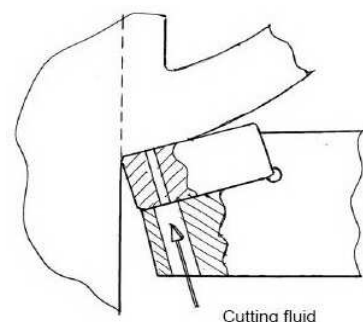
Application of cutting fluid at high pressure through the hole in the tool
